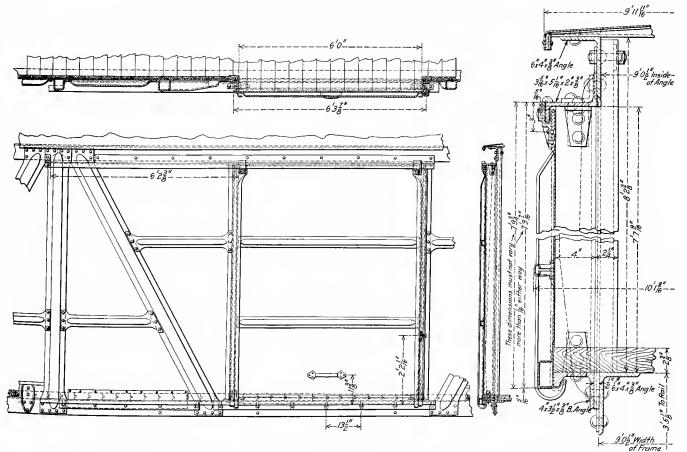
All-Steel Door Used on the Pennsylvania Railroad Steel Frame Box Car Shown in Figs. 270 and 271.
